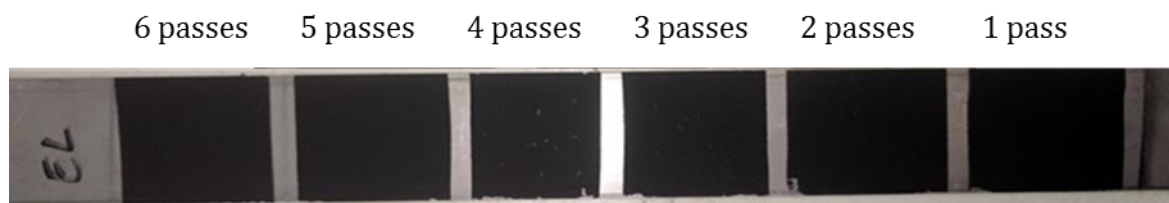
Electrolube painted 316L stainless steel strip specimen.
